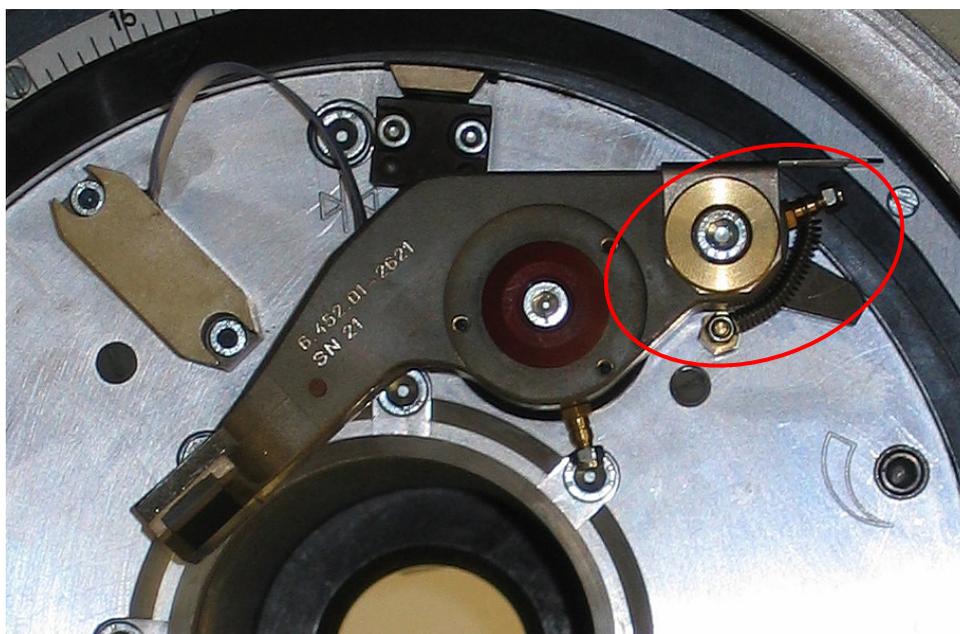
Test heads fitted, lid (7) not assembled, spring in position "drawing line"
